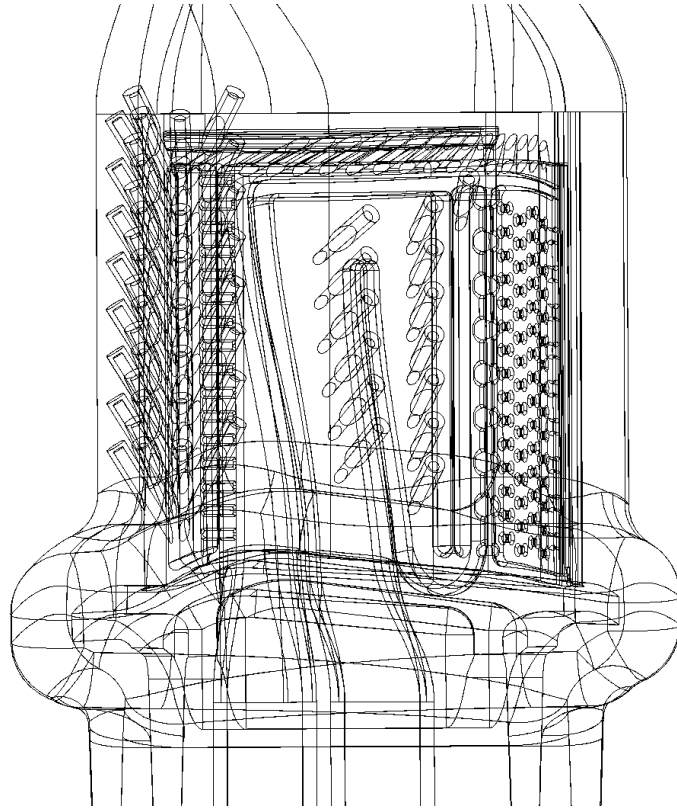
CAD model of a HP turbine blade mold in wire frame view.
